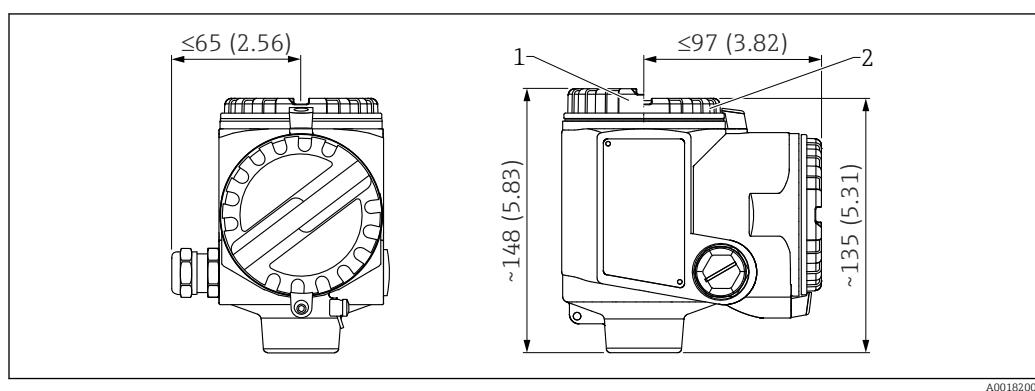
Dimensions of aluminum housing with separate terminal compartment. Unit of measurement mm (in)
